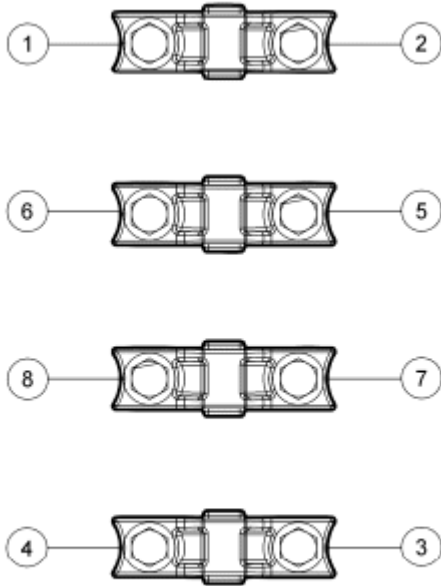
Locating RH Cylinder Head Camshaft Front Bearing Cap And Bolts
